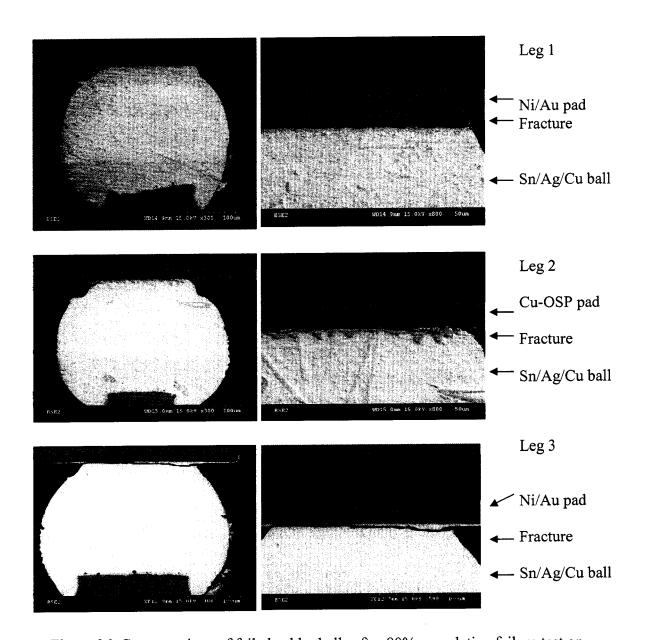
Cross-sections of failed solder balls after 80% cumulative failure test on zero-hour boards, face-down, Legs 1-3.
